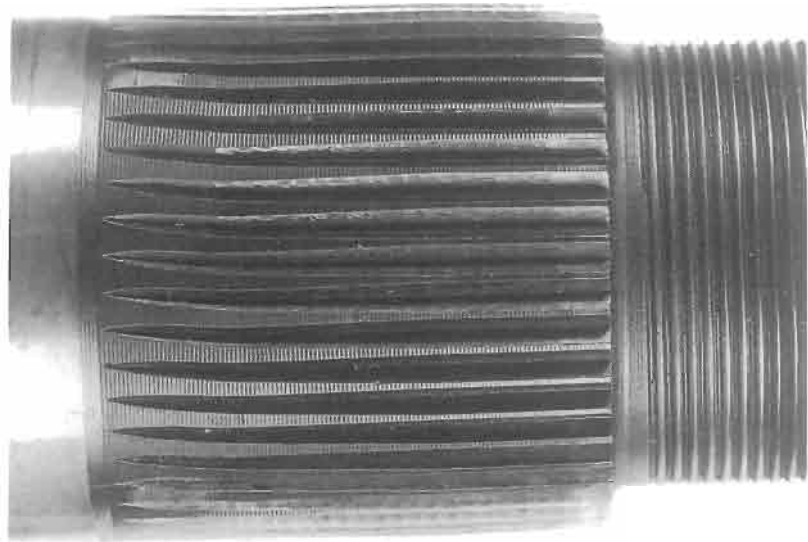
Photograph of the splined section of the steering shaft, showing the twisted splines.
